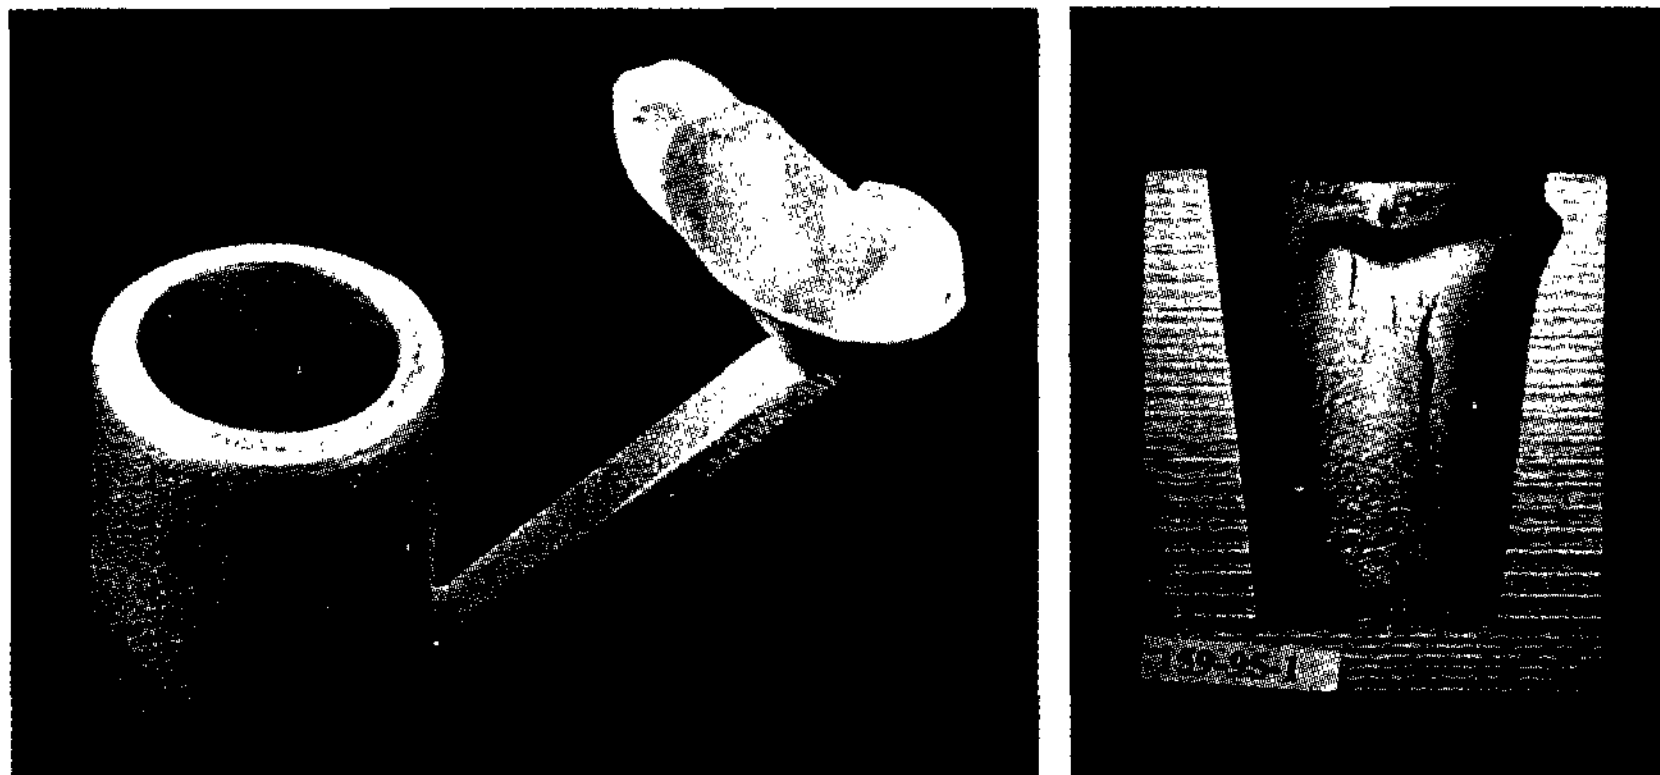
Photographs of (a) cup casting and (b) section of the cup showing the hot tear cracks, used in hot tearing studies
